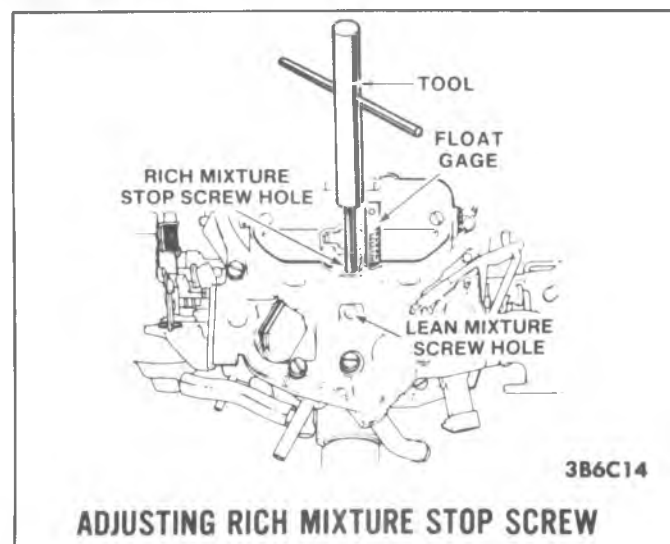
C1-14 Adjusting Rich Mixture Stop Screw
